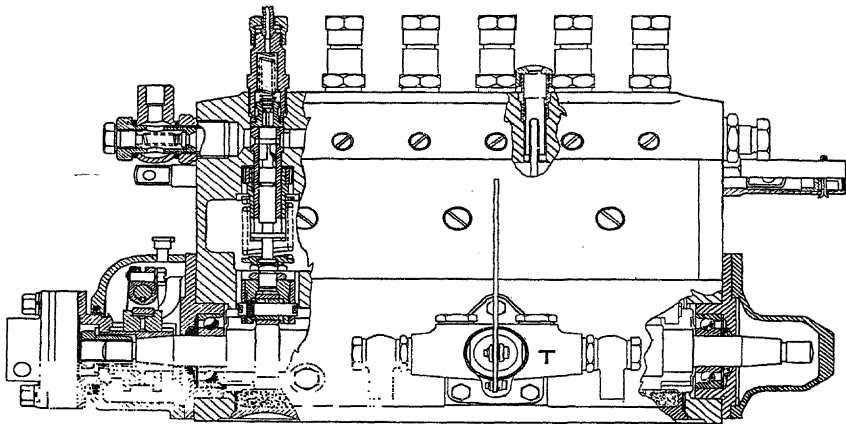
Cutaway of a Bosch fuel-injection pump.
